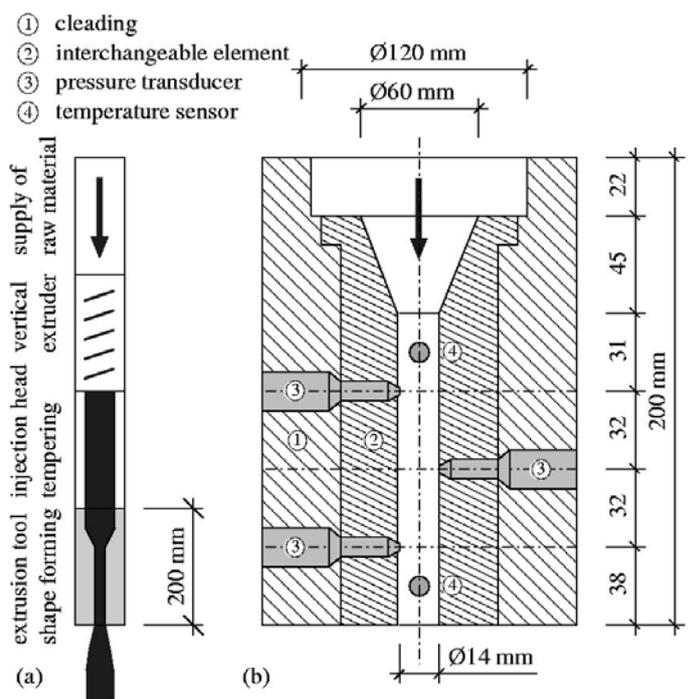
(a) Elements of extruder for rubber profile extrusion, (b) Dimensions of extrusion tool with circular cross-section.
